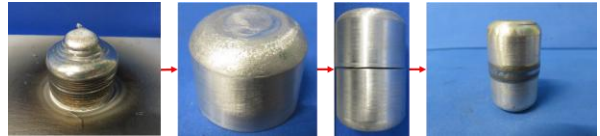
EBAM of tankage demonstrators. Following the sequence indicated by arrows: 1. Material as-deposited on the build plate (without post-processing). 2. Part removed from the build plate and machined to improve the surface finish. 3. Pre-weld assembly of two EBAM parts. 4. Finished demonstrator fabricated by EBW.
